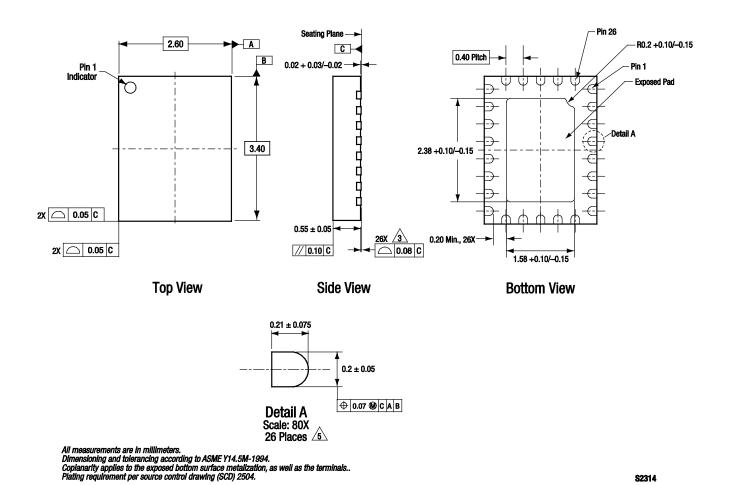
SKY13402-466LF 26-Pin QFN Package Dimensions
